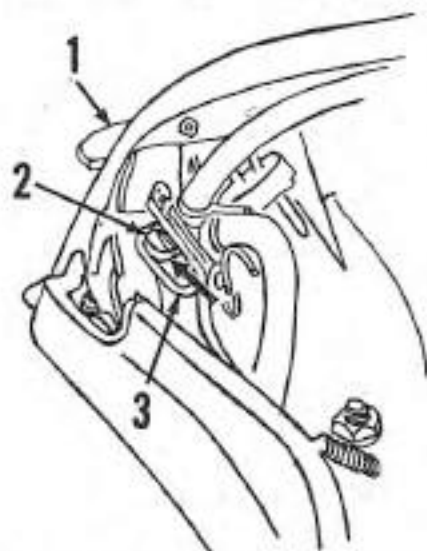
On early Fishing Scott models the fuel system bleeder valve is operated by the choke knob as shown. See text for details.
